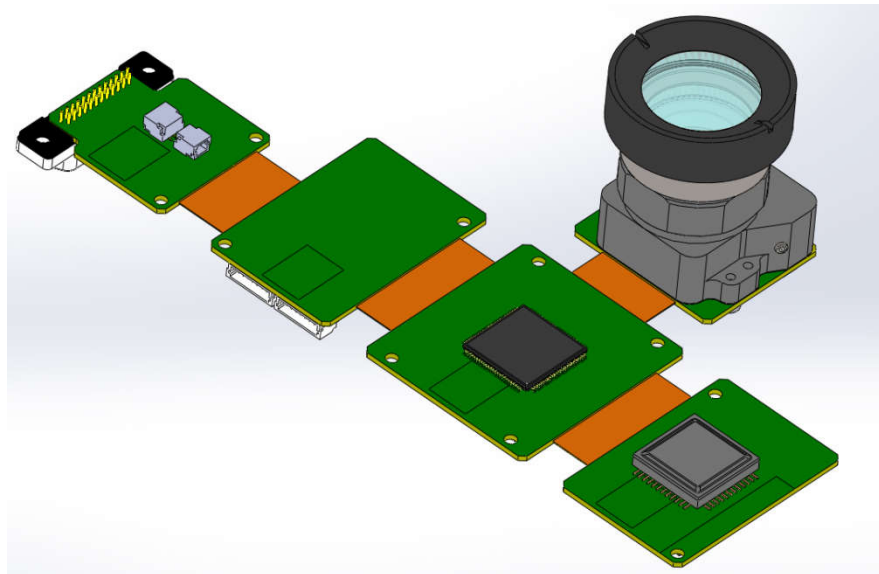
Flex-rigid printed board with an installed lens and lens-holder
